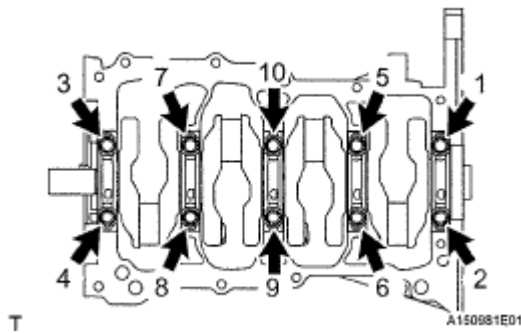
Locating Crankshaft Bolt Loosen Sequence
